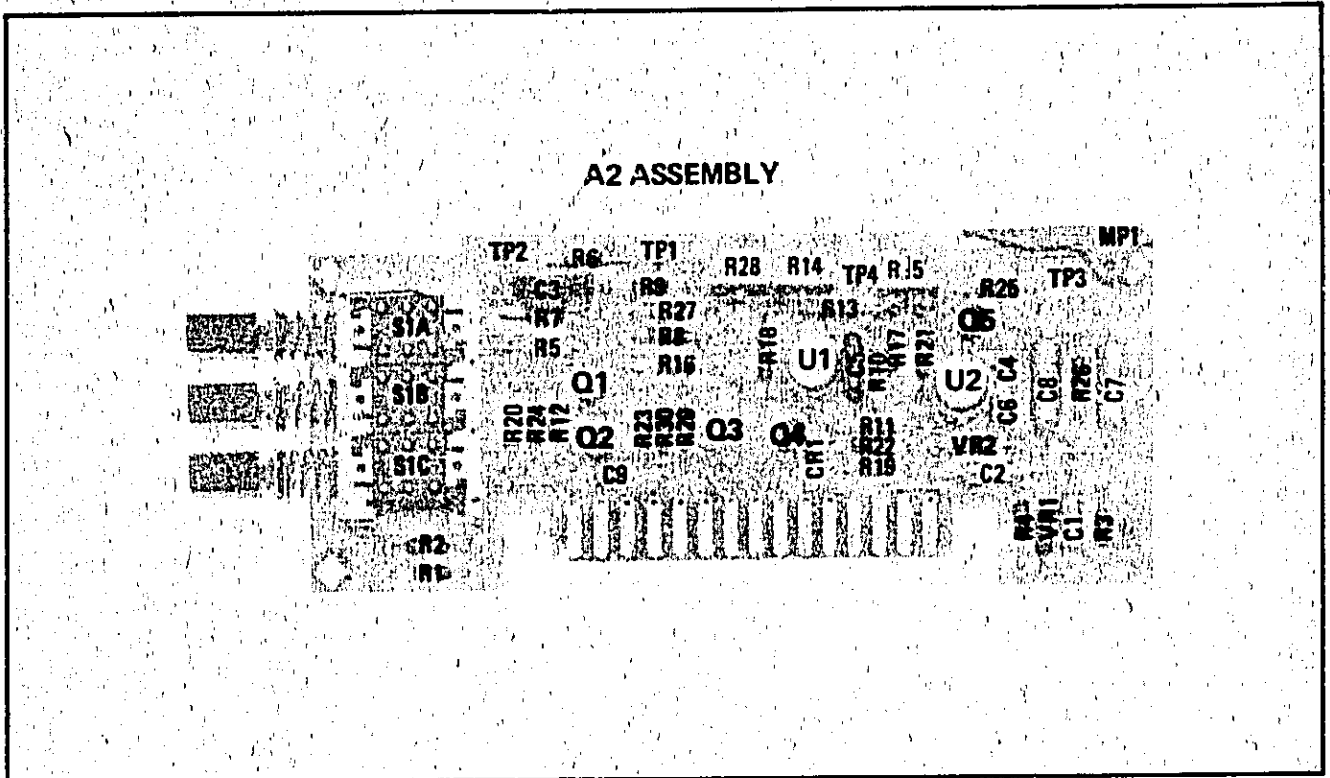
A2 Meter Switch and Drive Assembly Component Locations
